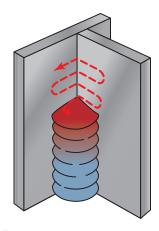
Vertical up welding weave patterns.
